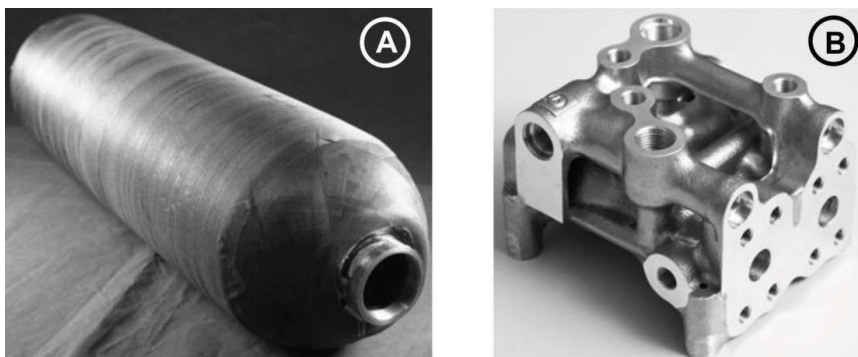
Lightweight hydraulic bladder (A) and aluminium casted manifold block (B)
